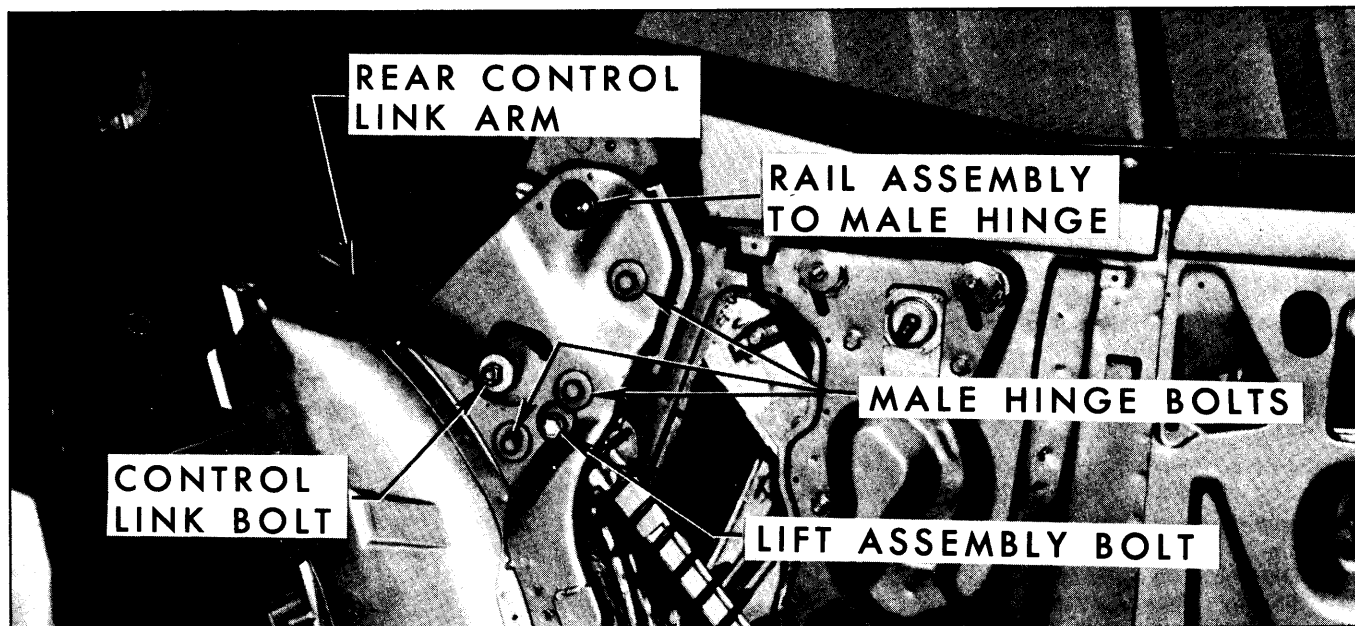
Folding Top Linkage Attachment "F" Styles
